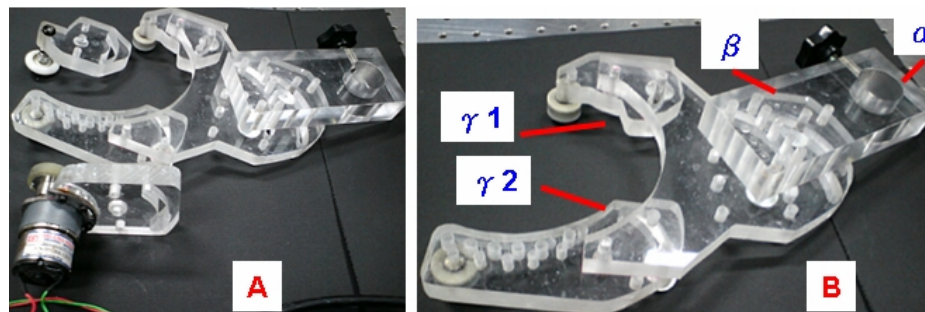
(A) flexible acrylic swing jig holder with DC motor (B) its enlarged view
